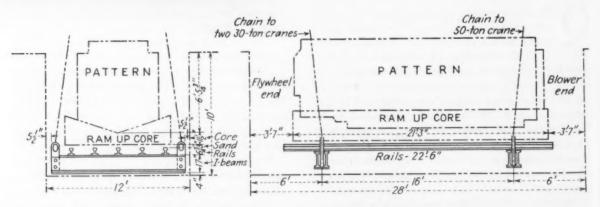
Arrangement for pit molding the 32-ton costing Note pairs of 1 beams, assembled to form lifting beams.
